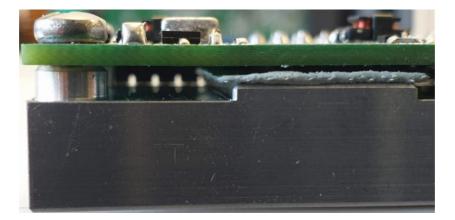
Details of the top-side cooling heatsink designed to improve mechanical contact
